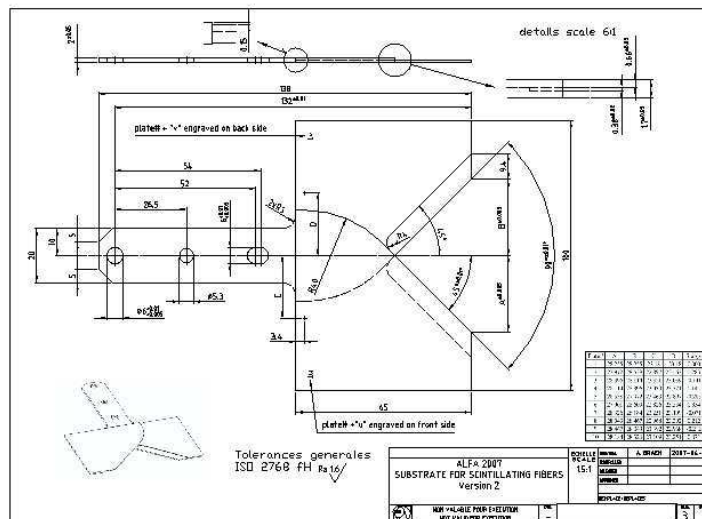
A detailed drawing of one side of a single plate used in the ALFA detector.
